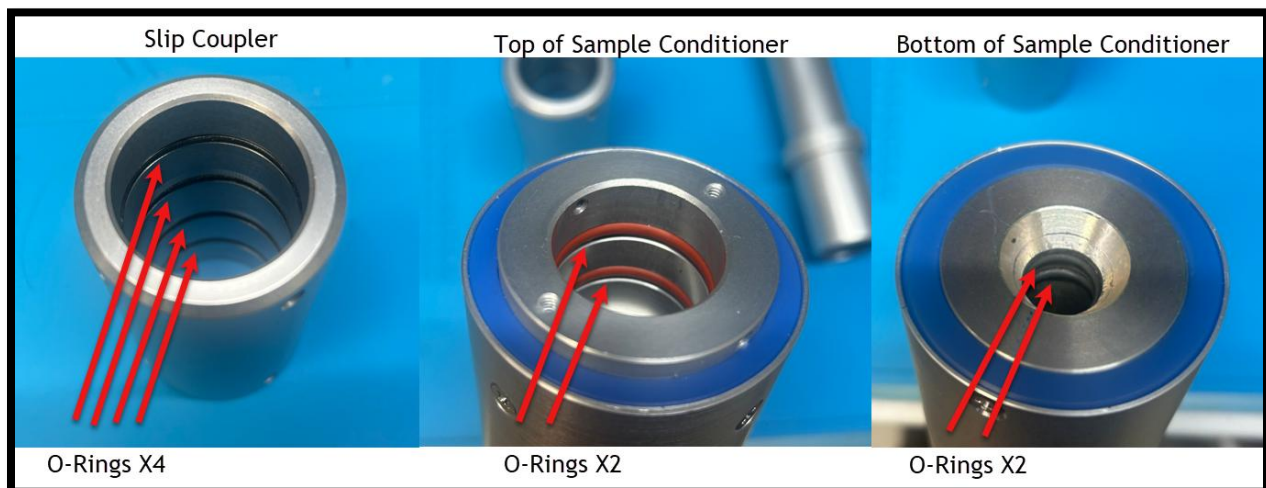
Slip Coupler and Sample Conditioner O-Ring Location
